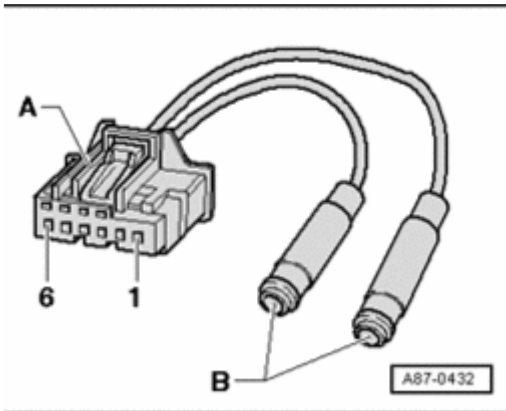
Adapter Cable, Modifying To Activate Positioning Motors
